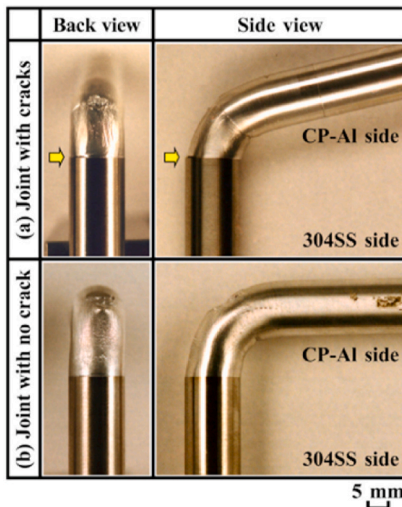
Appearances of joint bending tested specimens by reverse direction bending test: forge pressure of 150 MPa [84].
